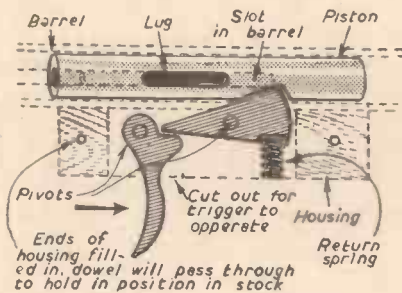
Trigger mechanism, showing engagement with piston in barrel.
